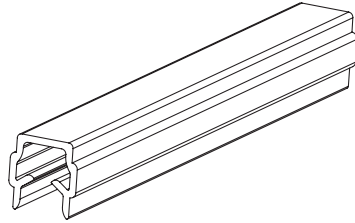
Groove cover for linear axes HM-B/HM-S
